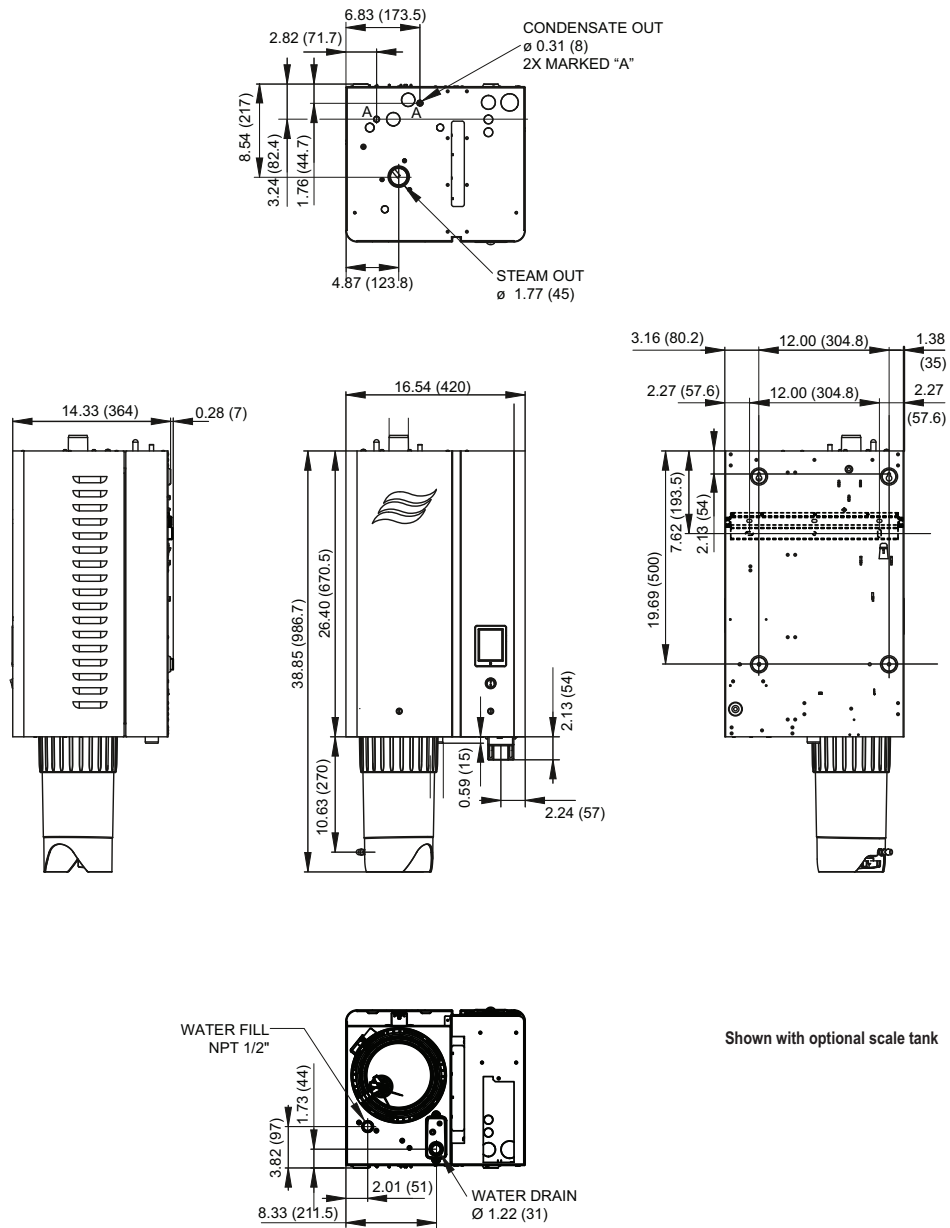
Unit dimensions unit "Small" - dimensions in Inch (mm)
